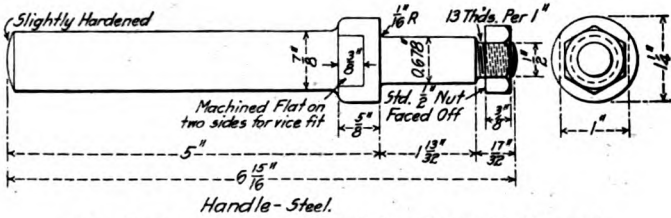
Ferrule Setting Tool for Tubes 2, 2 1/4 and 2 1/2 in. in Diameter.
